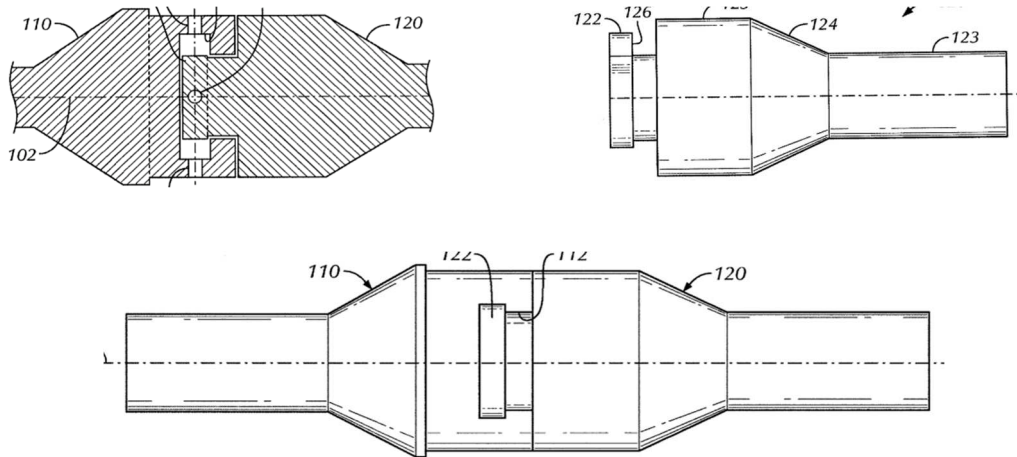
Non-threaded tool joint by Buytaert [28].
